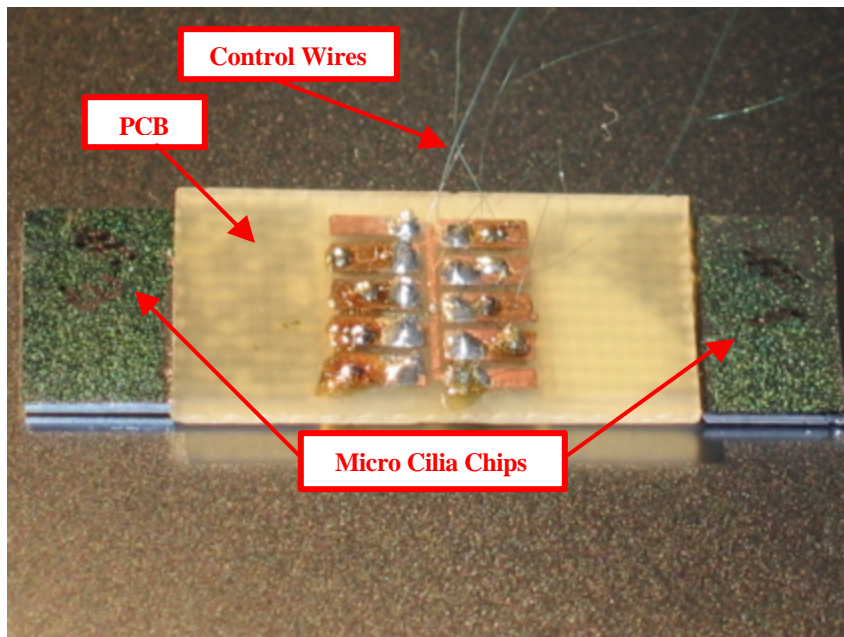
Top view of the microrobot. The printed circuit board (PCB) bonds two micro cilia array chips, thus forming the backbone of the microrobot. The contacts on the PCB electrically connect to control wires.
